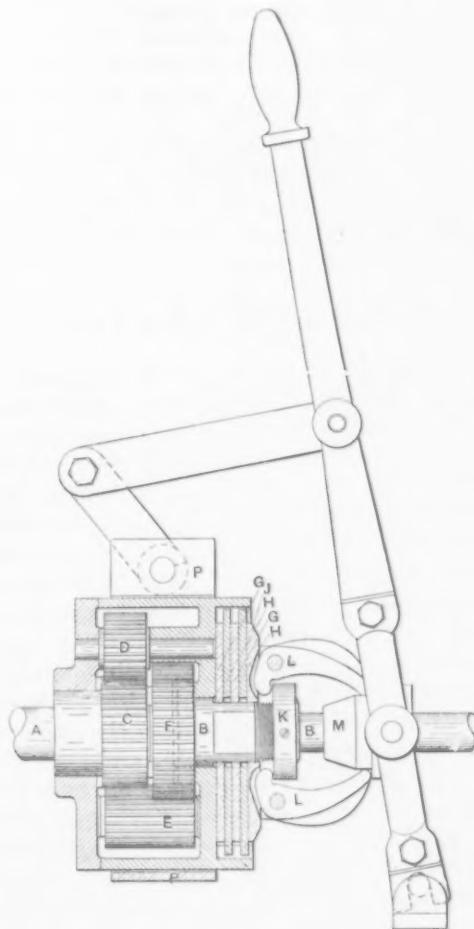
Sectional Detail of the Reversing Mechanism.
